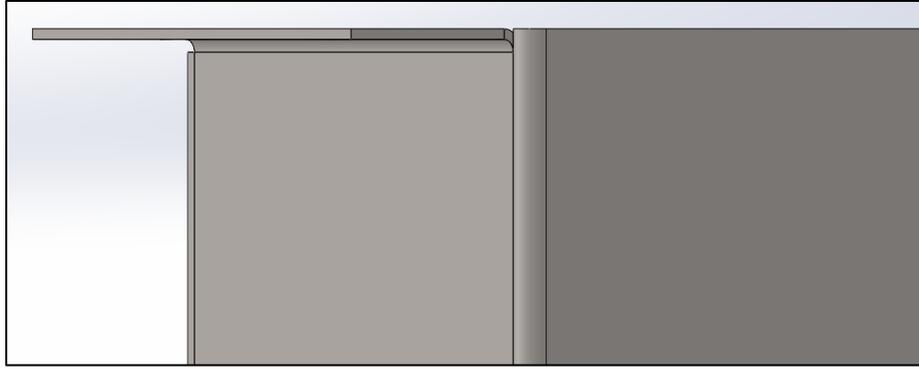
The upper flange on the bottom crushing chamber casing sitting flush with the front face
